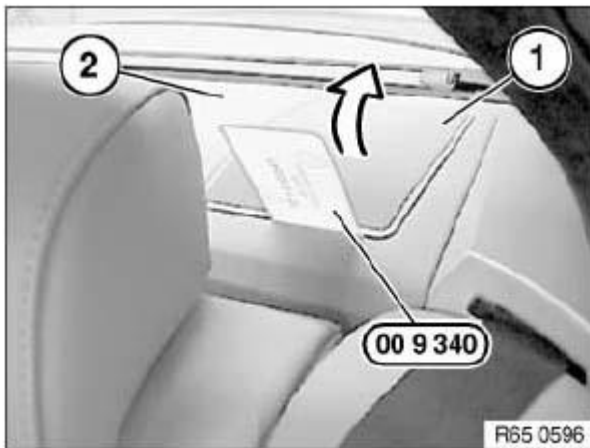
Removing Speaker Cover With Special Tool 00 9 341 Of Rear Shelf
